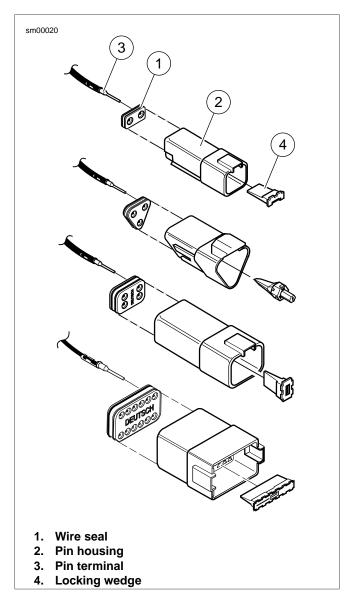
Deutsch Connector: 2, 3, 4 and 12-Place Pin Housings
